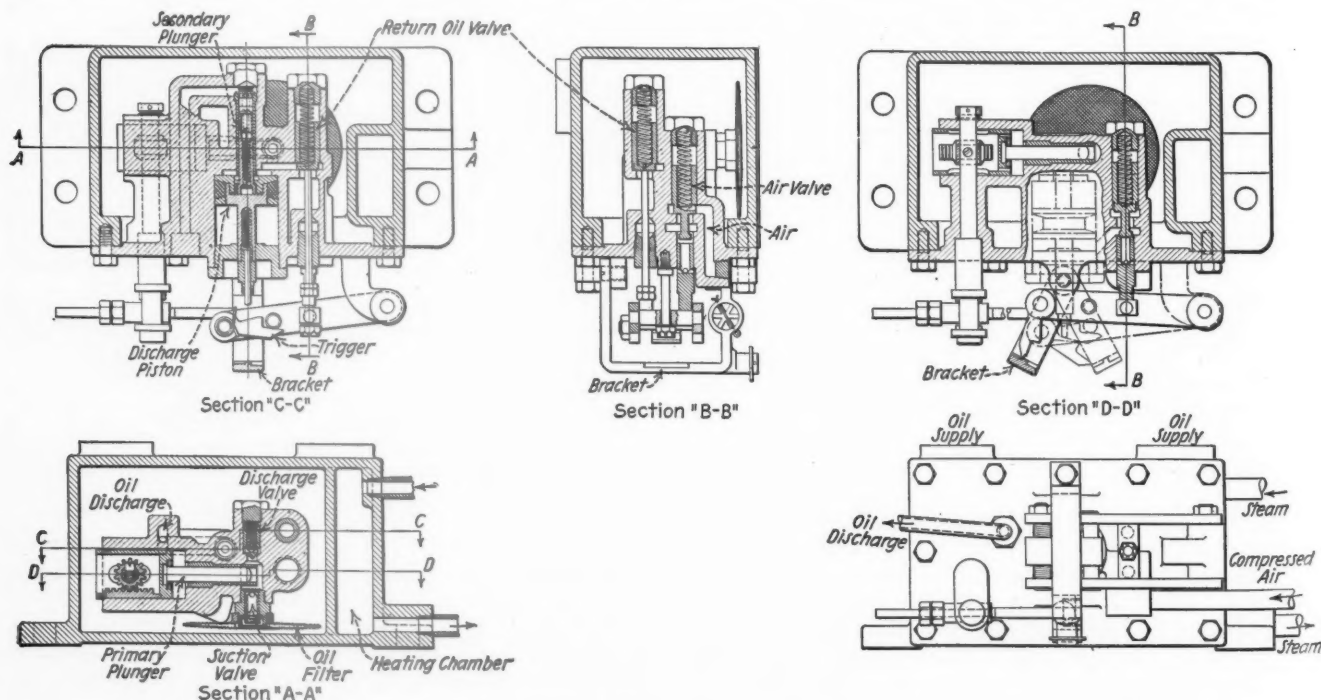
Sectional views of the Boec locomotive cylinder lubricator
